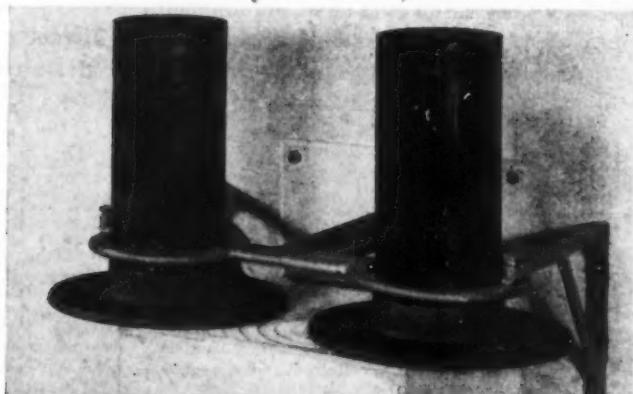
Above—Induction brazing equipment showing parts in place and finished assembly
